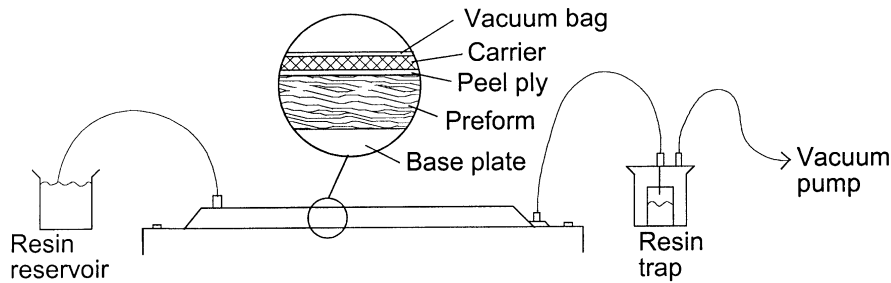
Illustration of the Vacuum Assisted Resin Injection technique
